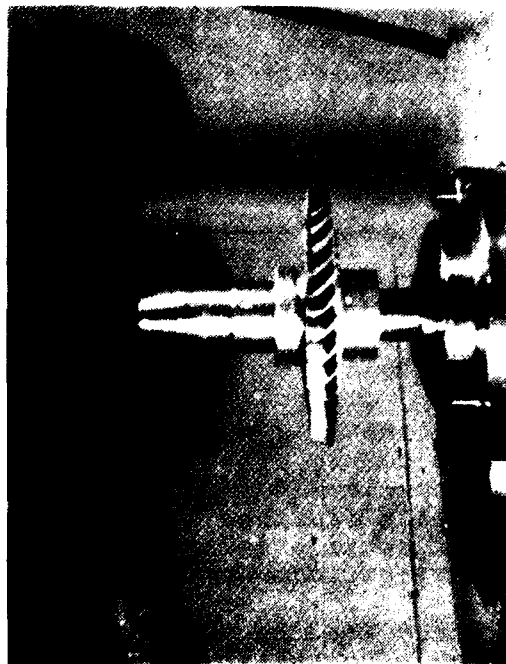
Arbor Assembly Installed in Spin Pit Prior to Test.
